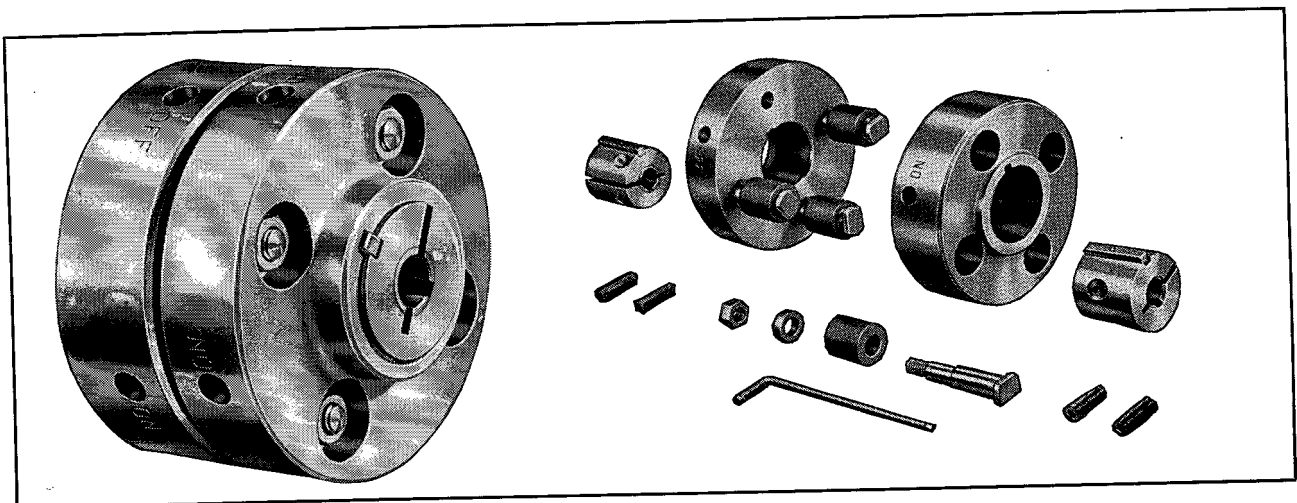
Assembled Magic-Grip coupling shown on left. Note the recesses in the bushing for the set screws in the exploded view on the right.
